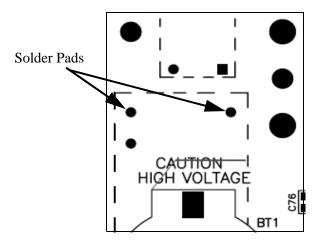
Tinned Jumper Wire Placement for Boards Rev D, E, F, G
